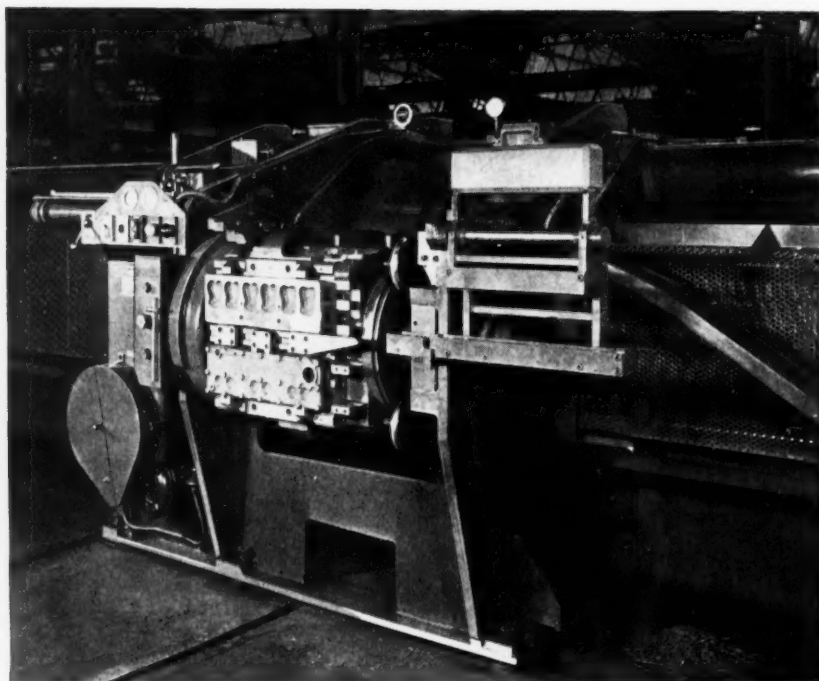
Close-up View of Drum Type Fixture and Transfer Frame of Machine Shown in Fig. 1
